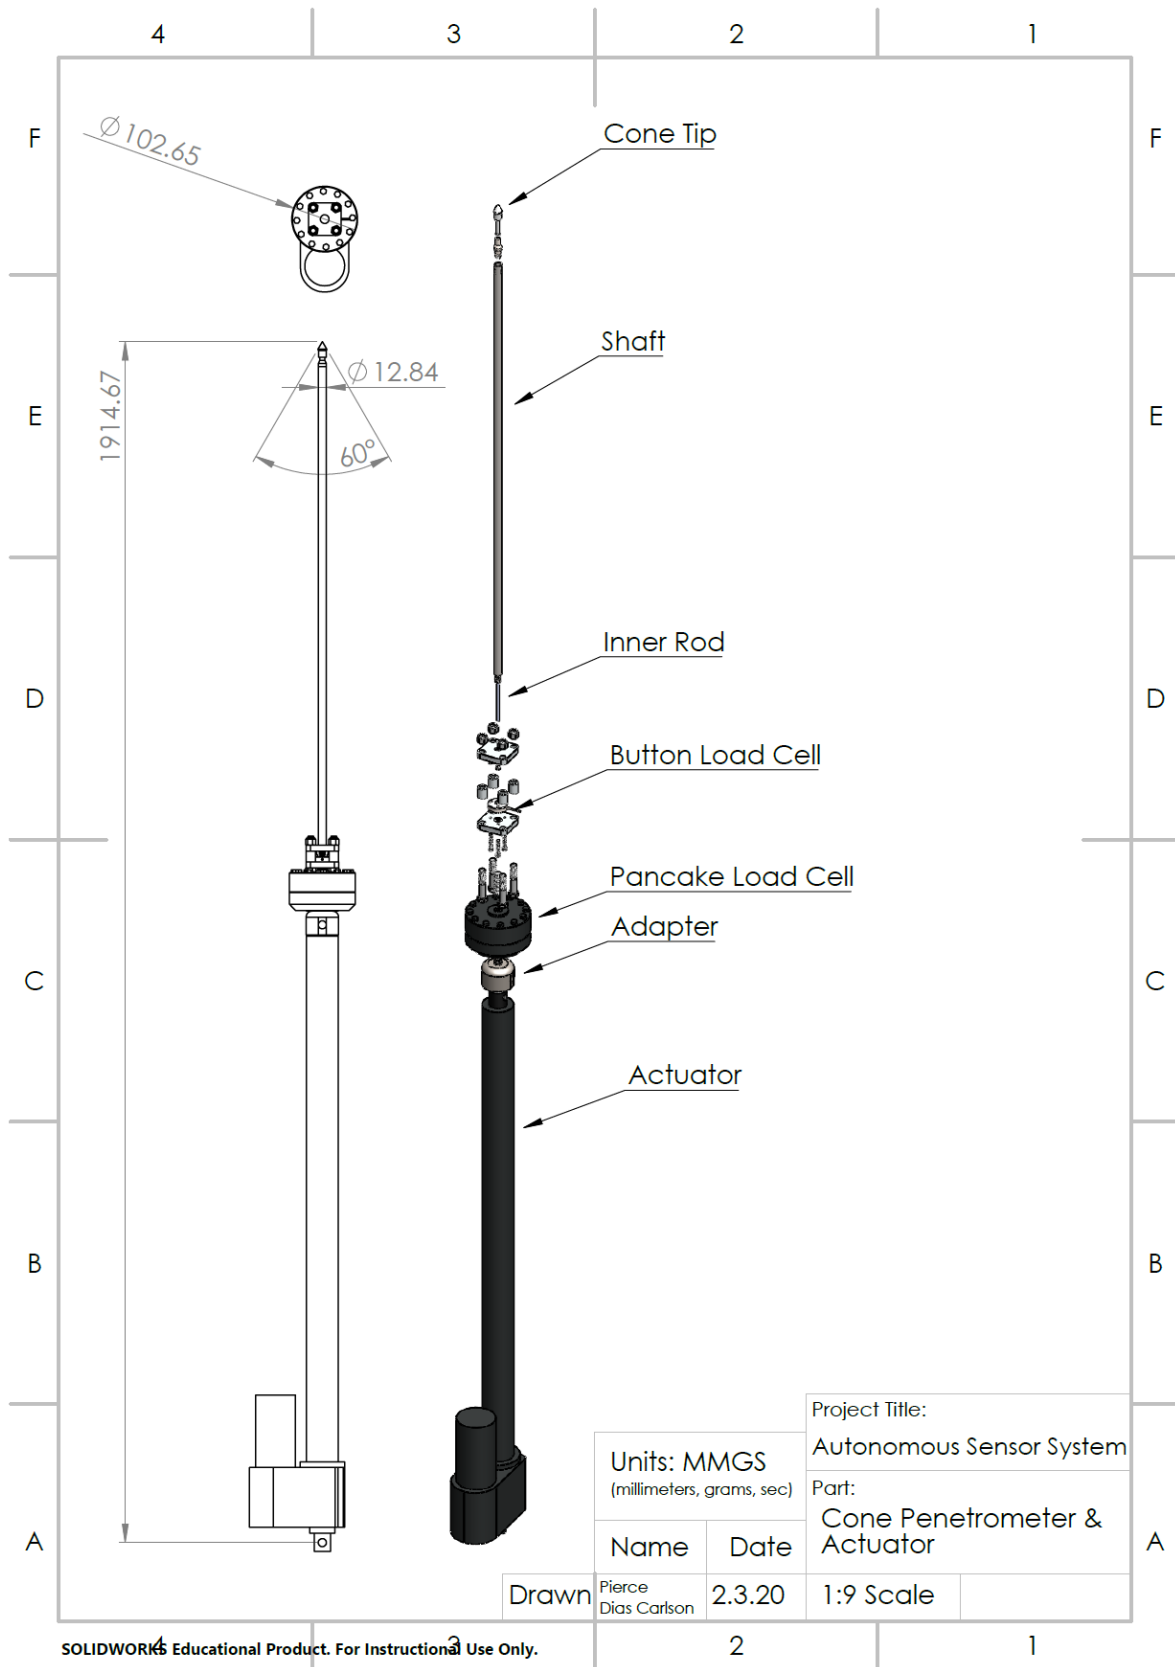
2D engineering drawing of Dual Load Cell Penetrometer (DLCP)
